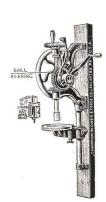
NO. 101 BALL-BEARING SELF-FEED DRILL
